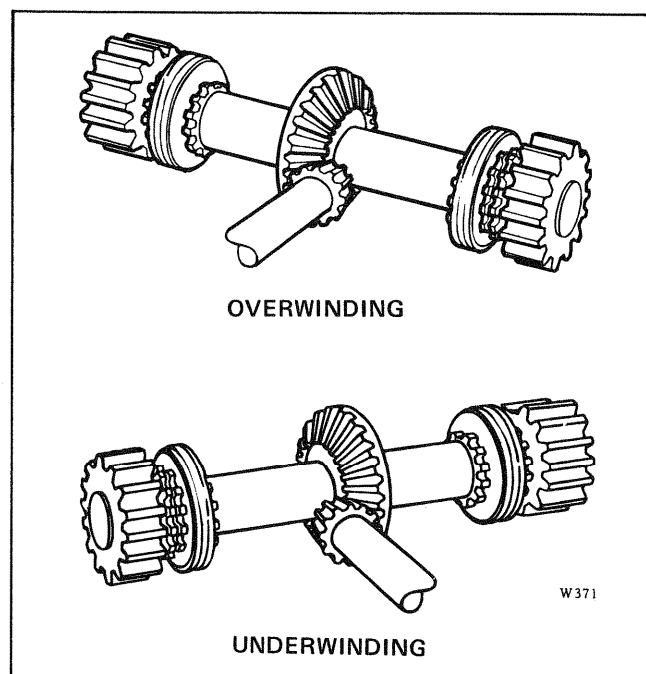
BEVEL GEAR SHAFT OVERWIND AND UNDERWIND ARRANGEMENT
